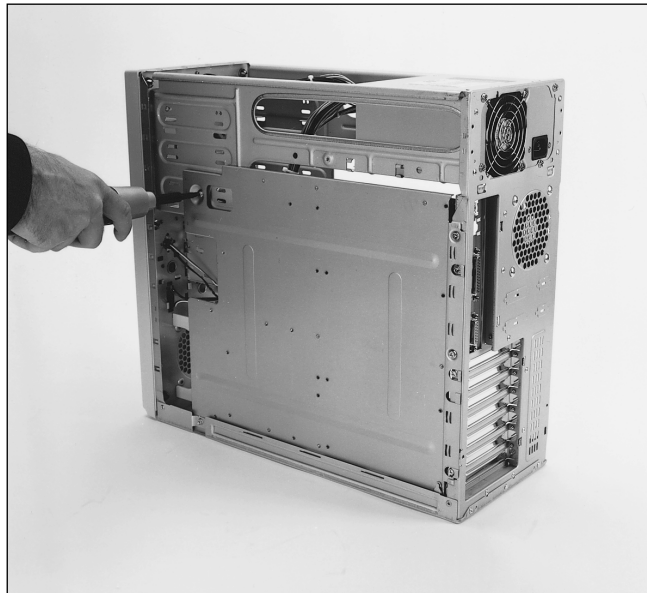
Installing the screws that hold the motherboard tray to the chassis. *Case courtesy of PC Power & Cooling, Inc.
